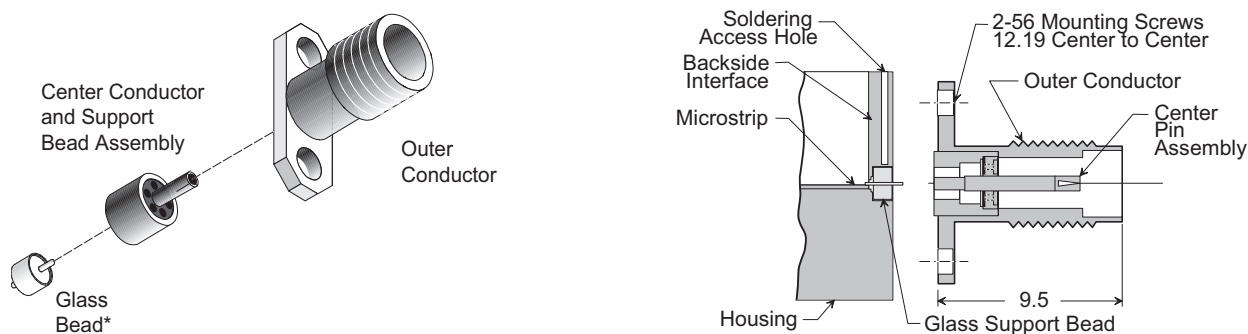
K103F-R or EK103F-R Assembly (*Glass Bead not supplied)
